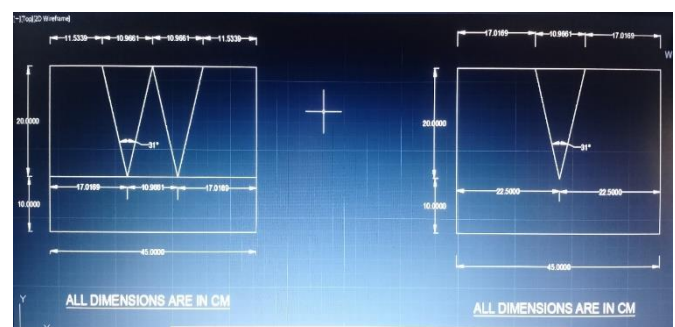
The above figure shows the Auto CAD drawing of segments 1, 2 of v notch
